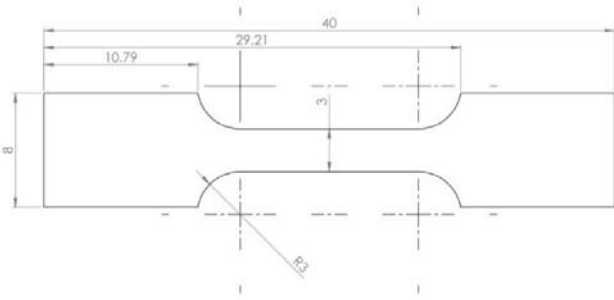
Engineering drawing of the Mini1 tensile specimen; the measurements are in 'mm'
